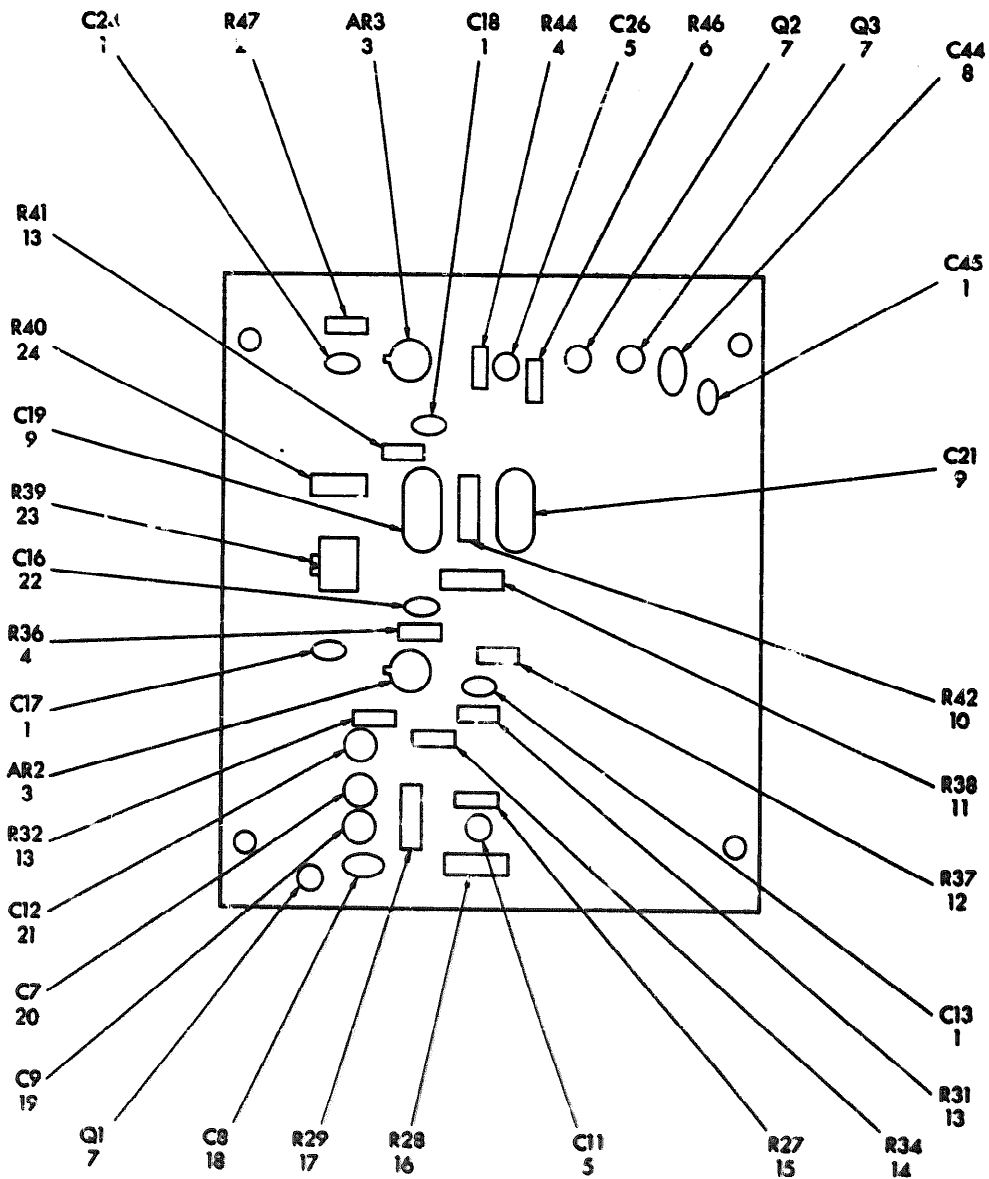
CIRCUIT CARD ASSEMBLY A1A1
